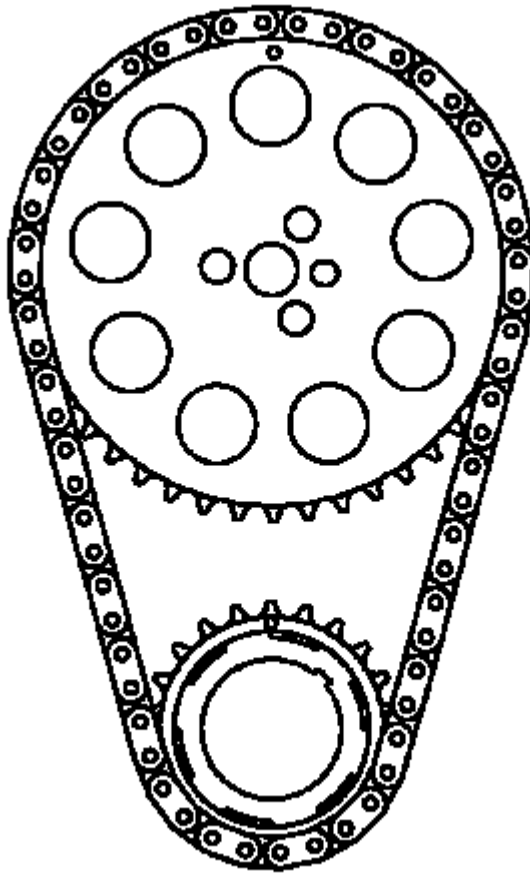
View of Crankshaft/Camshaft In Position For Number 1 Piston At TDC
